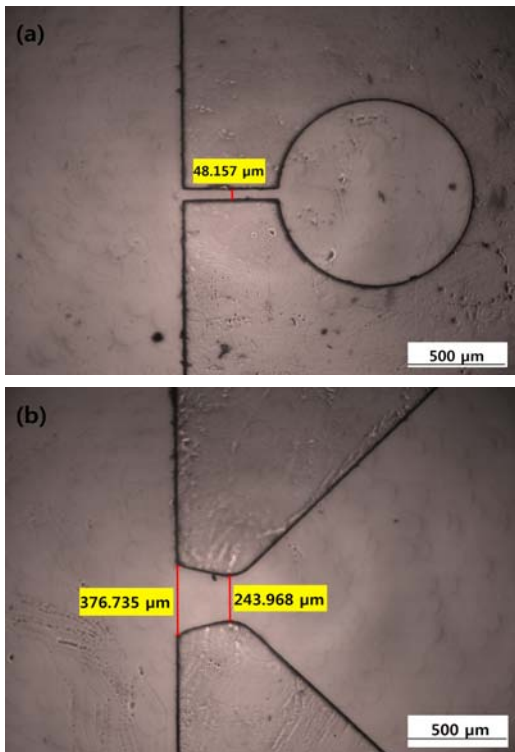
Fabricated micro-thruster injector (a) and nozzle (b)
